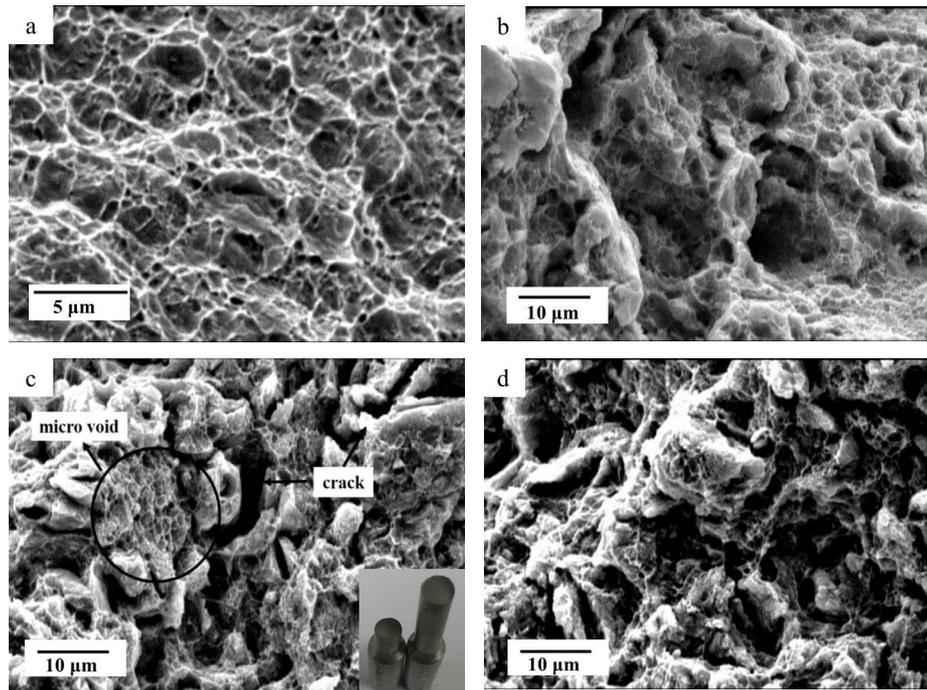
Fracture surface of milled and extruded samples: a) pure Al b) Al-1 wt. % BN c) Al-2 wt. % BN d) Al-4 wt. % BN.
